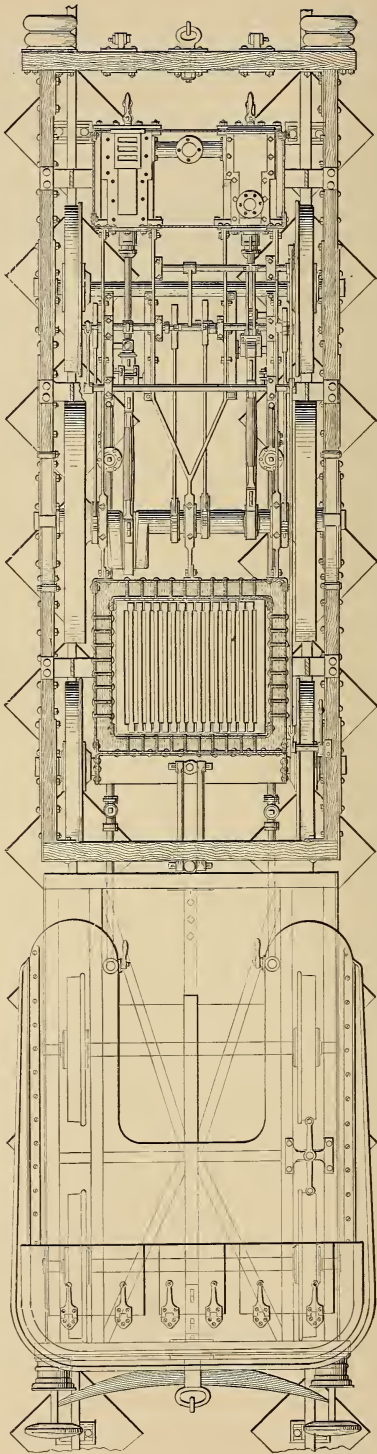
A PLAN OF THE ENGINE AND TENDER
